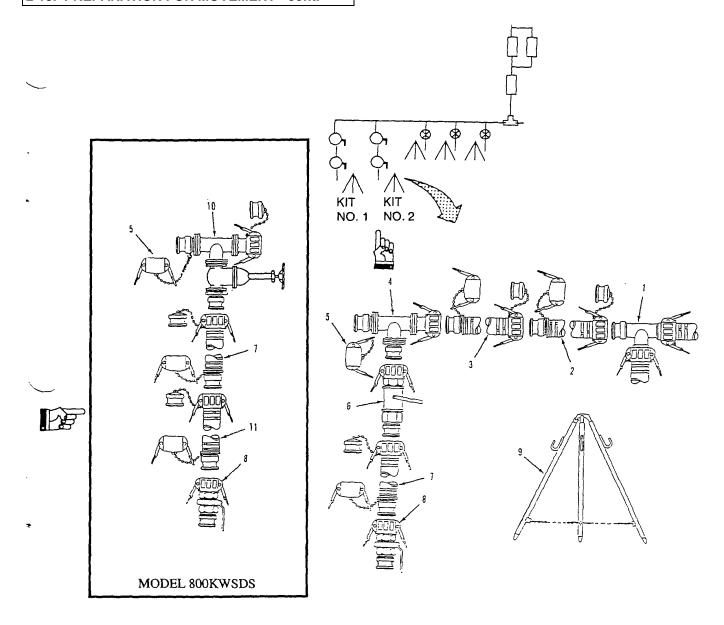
4-Inch Hose Connection Kit Disassembly.
